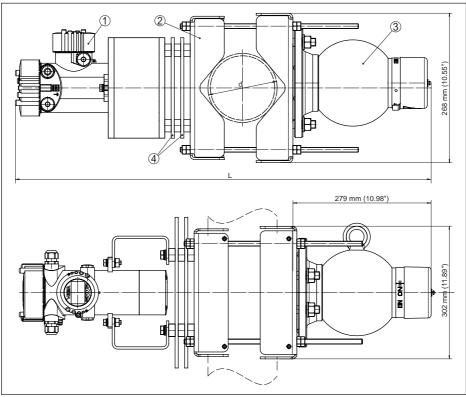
Mounting bracket with horizontally mounted sensor and heat protection kit
